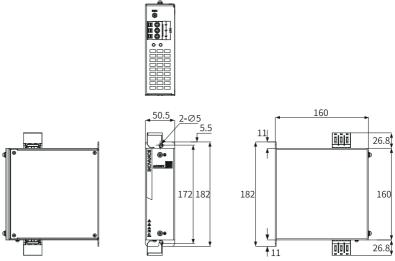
Overall and mounting dimensions of the filter unit (unit: mm)
